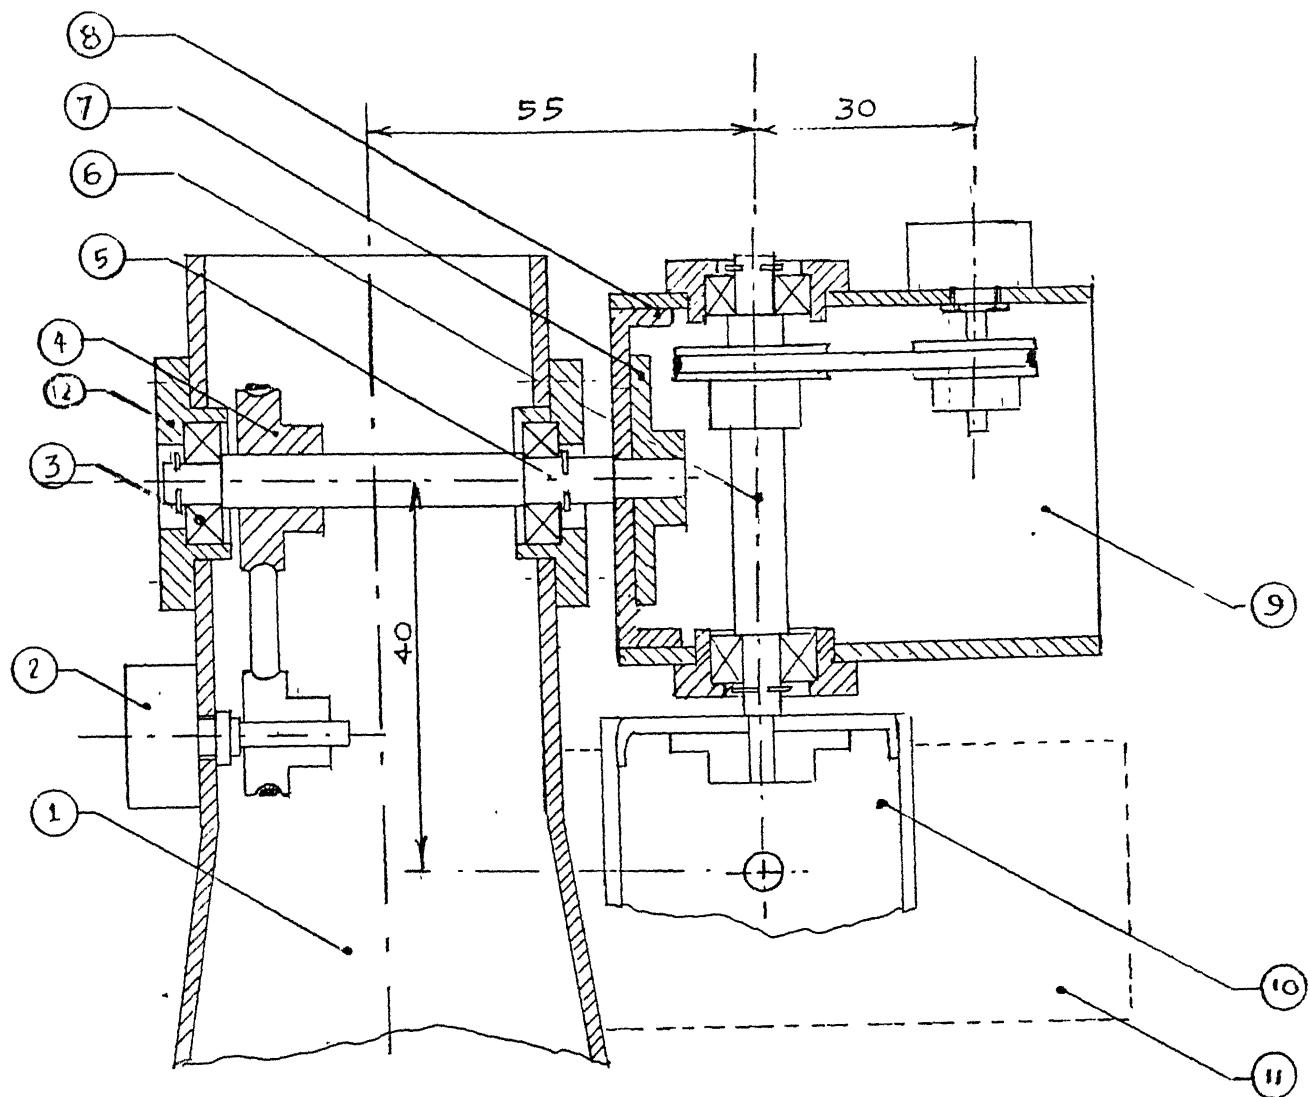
PITCH, YAW & ROLL JOINT ASSEMBLY
